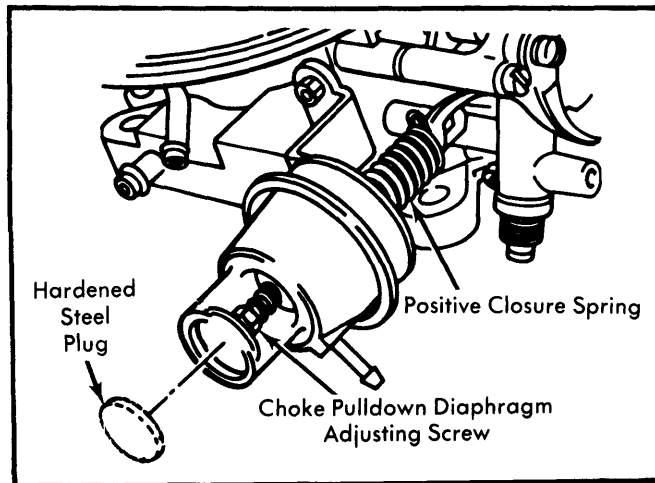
Choke Pulldown Adjustment (Initial Choke Valve Clearance)
